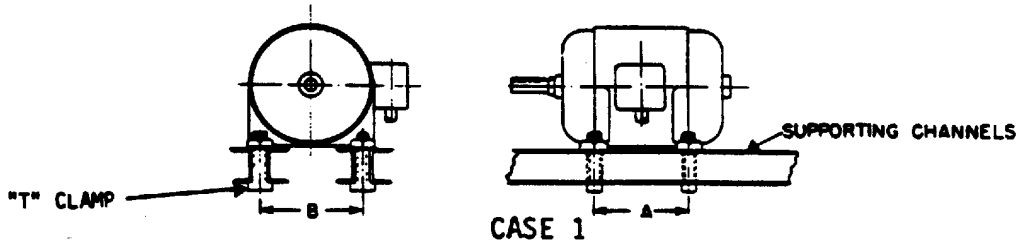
Standard mounting platform for testing equipment on mediumweight shock testing machine. (Sheet 1 of 3)
